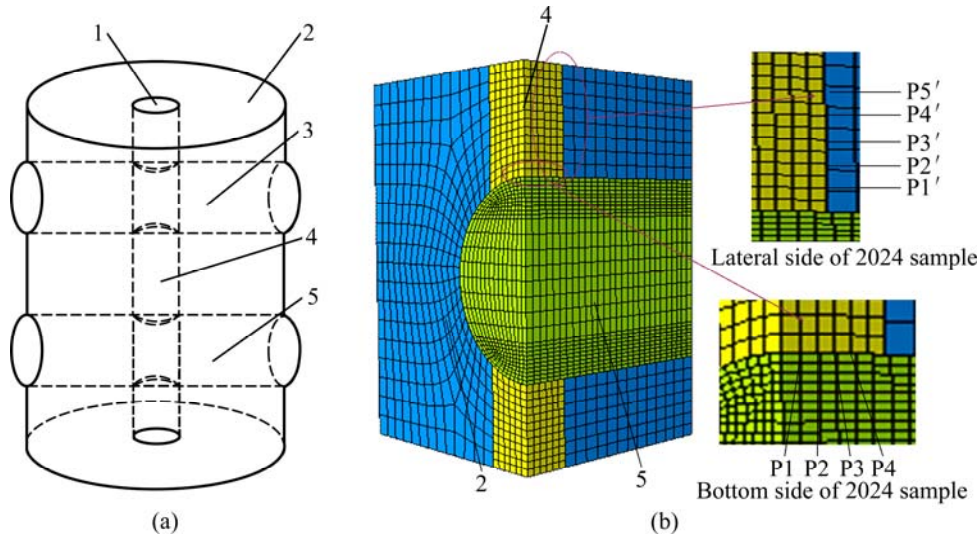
Schematic drawing of 2024/mould pressure heat treatment model (a) and finite element mesh of model (b): 1—Center hole; 2—42CrMo mould; 3—Upper cylindrical pin (42CrMo); 4—2024 sample; 5—Lower cylindrical pin
